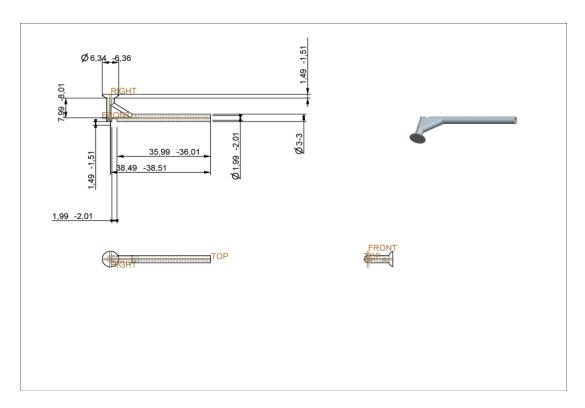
Design drawing of the micro sprinkler sample to be moulded
